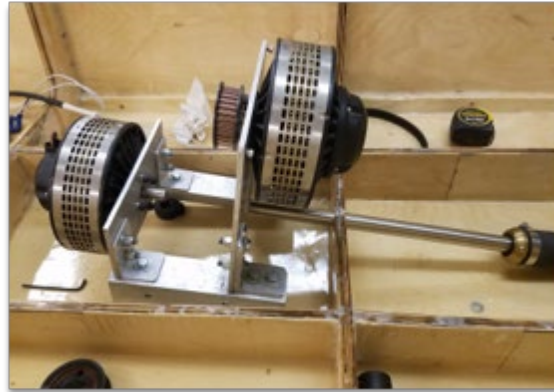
Previous Motor and Driveshaft Setup for Drivetrain
